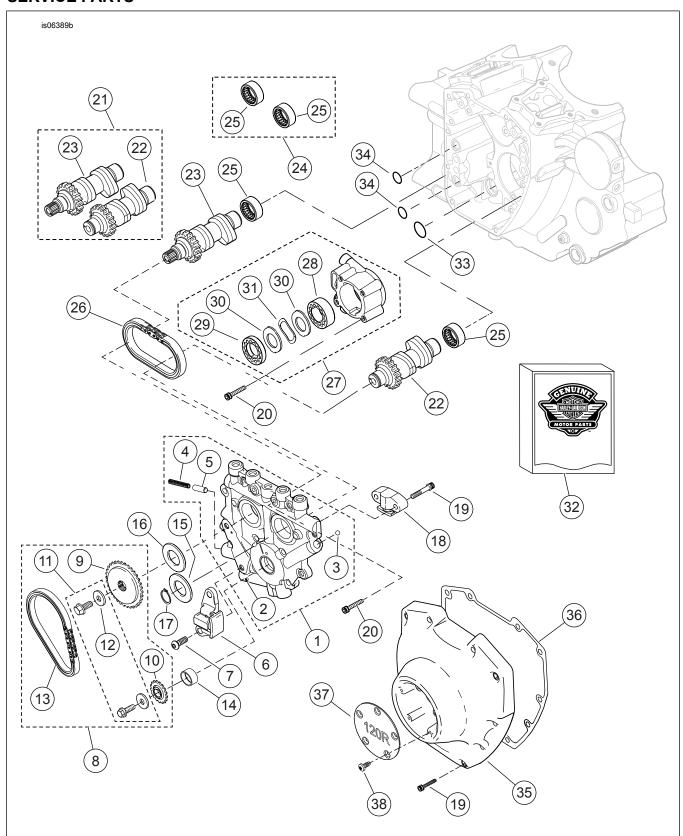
SE120R Screamin' Eagle Pro Crate Engine (Beta) Camshafts and Camshaft Cover
